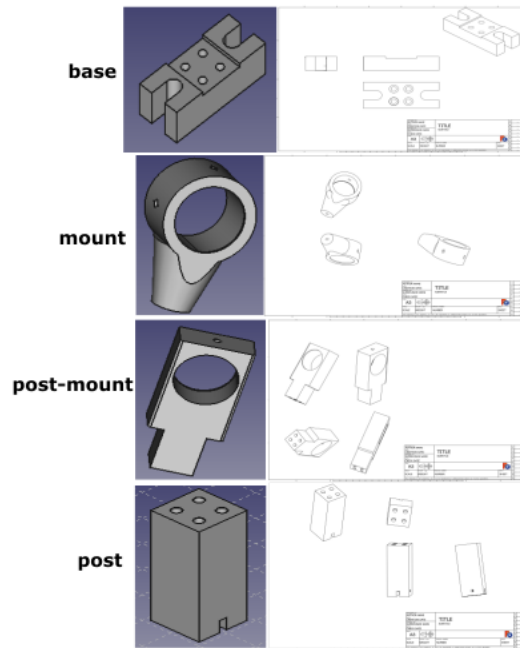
Drawings of the mechanical components using the Freecad software.
